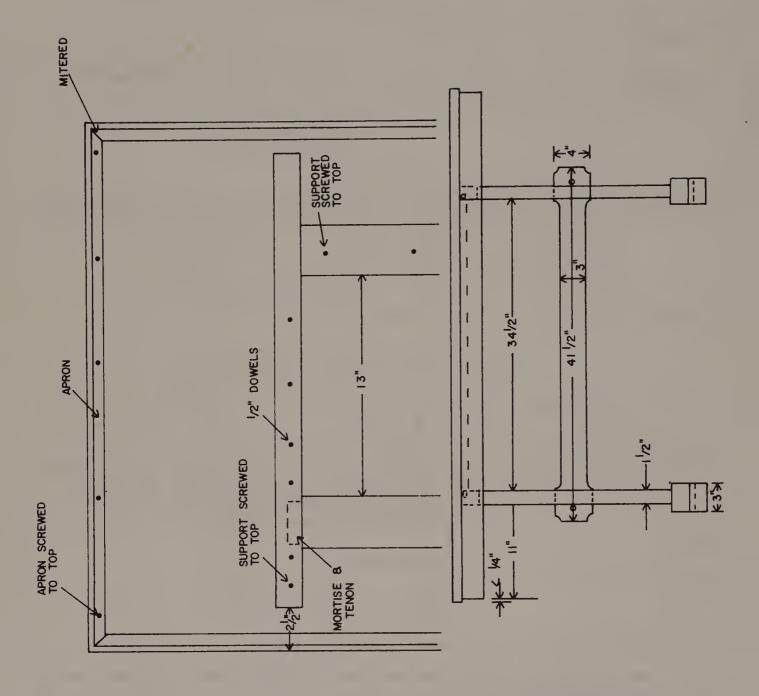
This trestle table makes a fine piece of dining room furniture.
